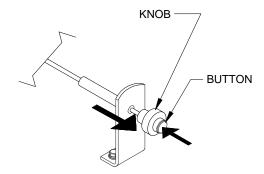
DISENGAGE PLATFORM FROM ENCLOSURE
